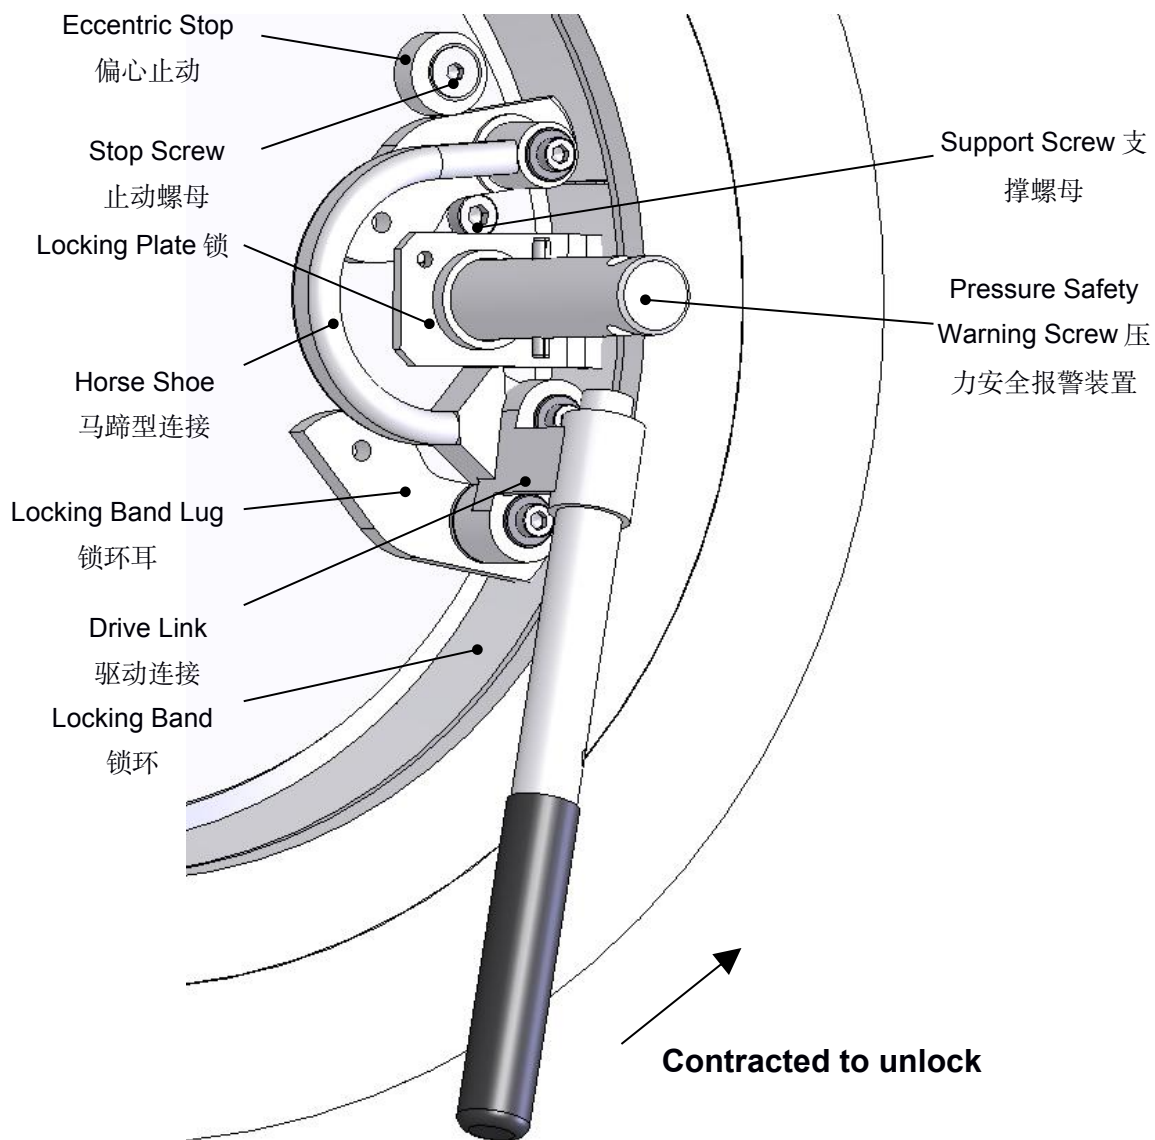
Bandlock™ 2 Closure Locking Mechanism Components.
